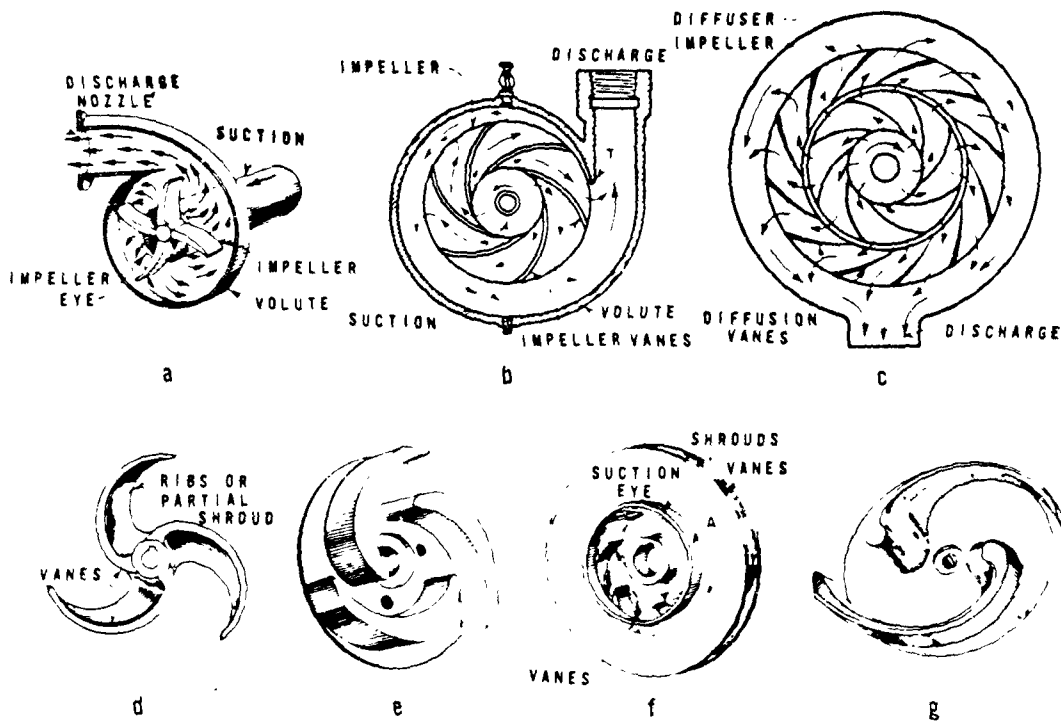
Centrifugal pumps: (a) Principle of centrifugal-type pump, (b) radial section through volute-type pump, (c) radial section through diffuser-type pump, (d) open impeller, (e) semi-enclosed impeller, (f) closed impeller, (g) nonclog impeller [22].
